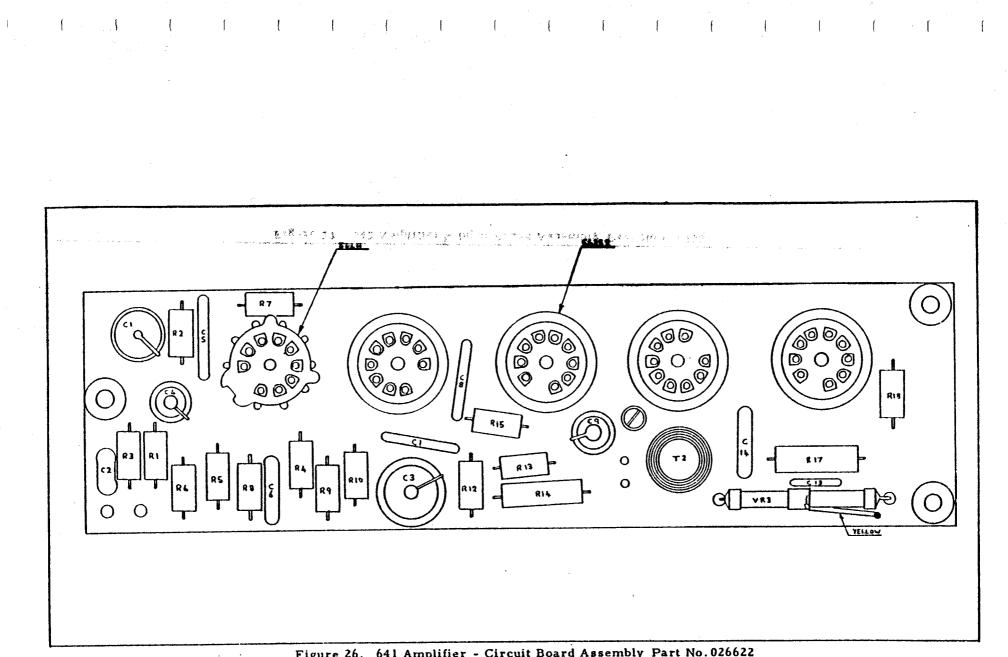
641 Amplifier - Circuit Board Assembly Part No. 026622
